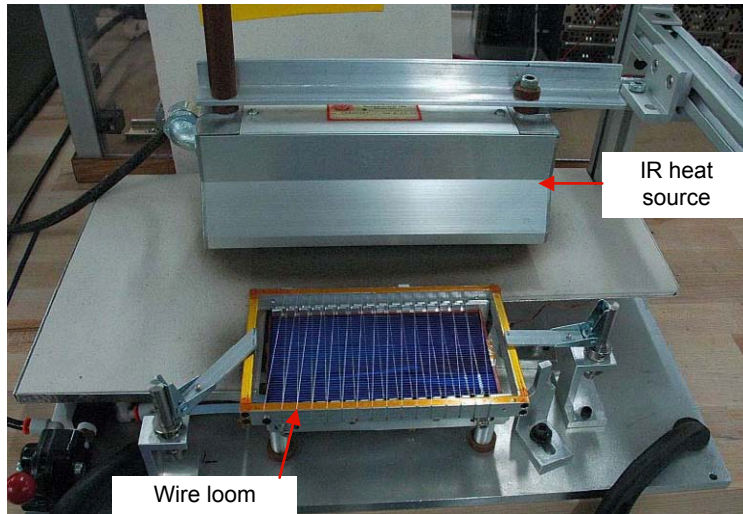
Wire soldering jig illustrating attachment of busbar wires.
